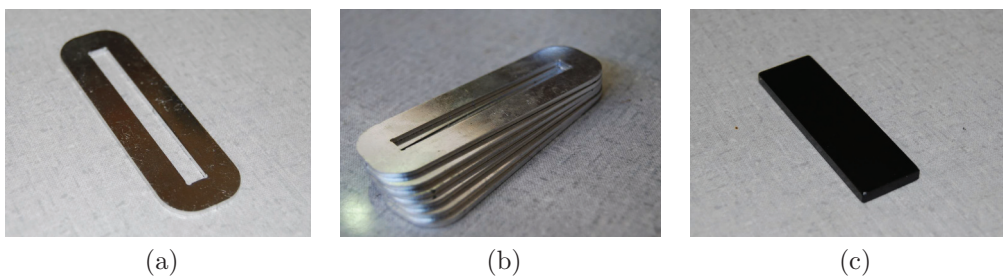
The active conductor components of the slip coupler, with (a) a single aluminium plate and (b) a stack of aluminium plates shown. A magnet used in the prototype is shown in (c).
